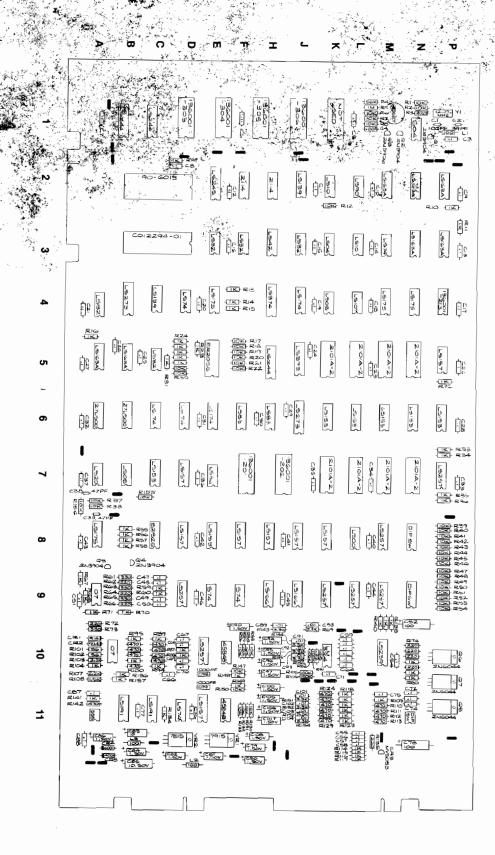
Centipede™ Game PCB Assembly A037241-01 G
